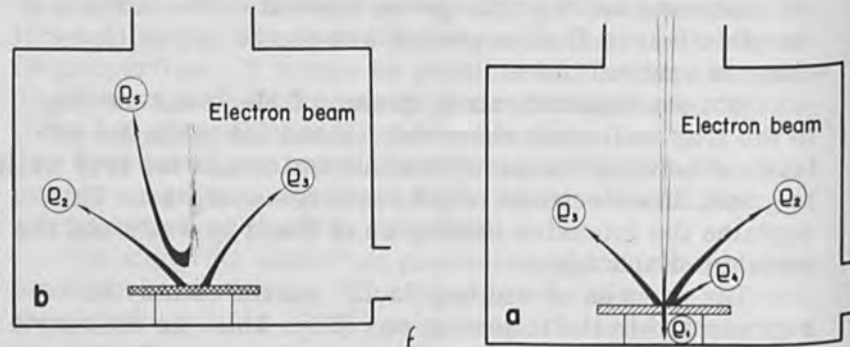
Electron transport paths, (a) on welding metals (b) on welding ceramics.
